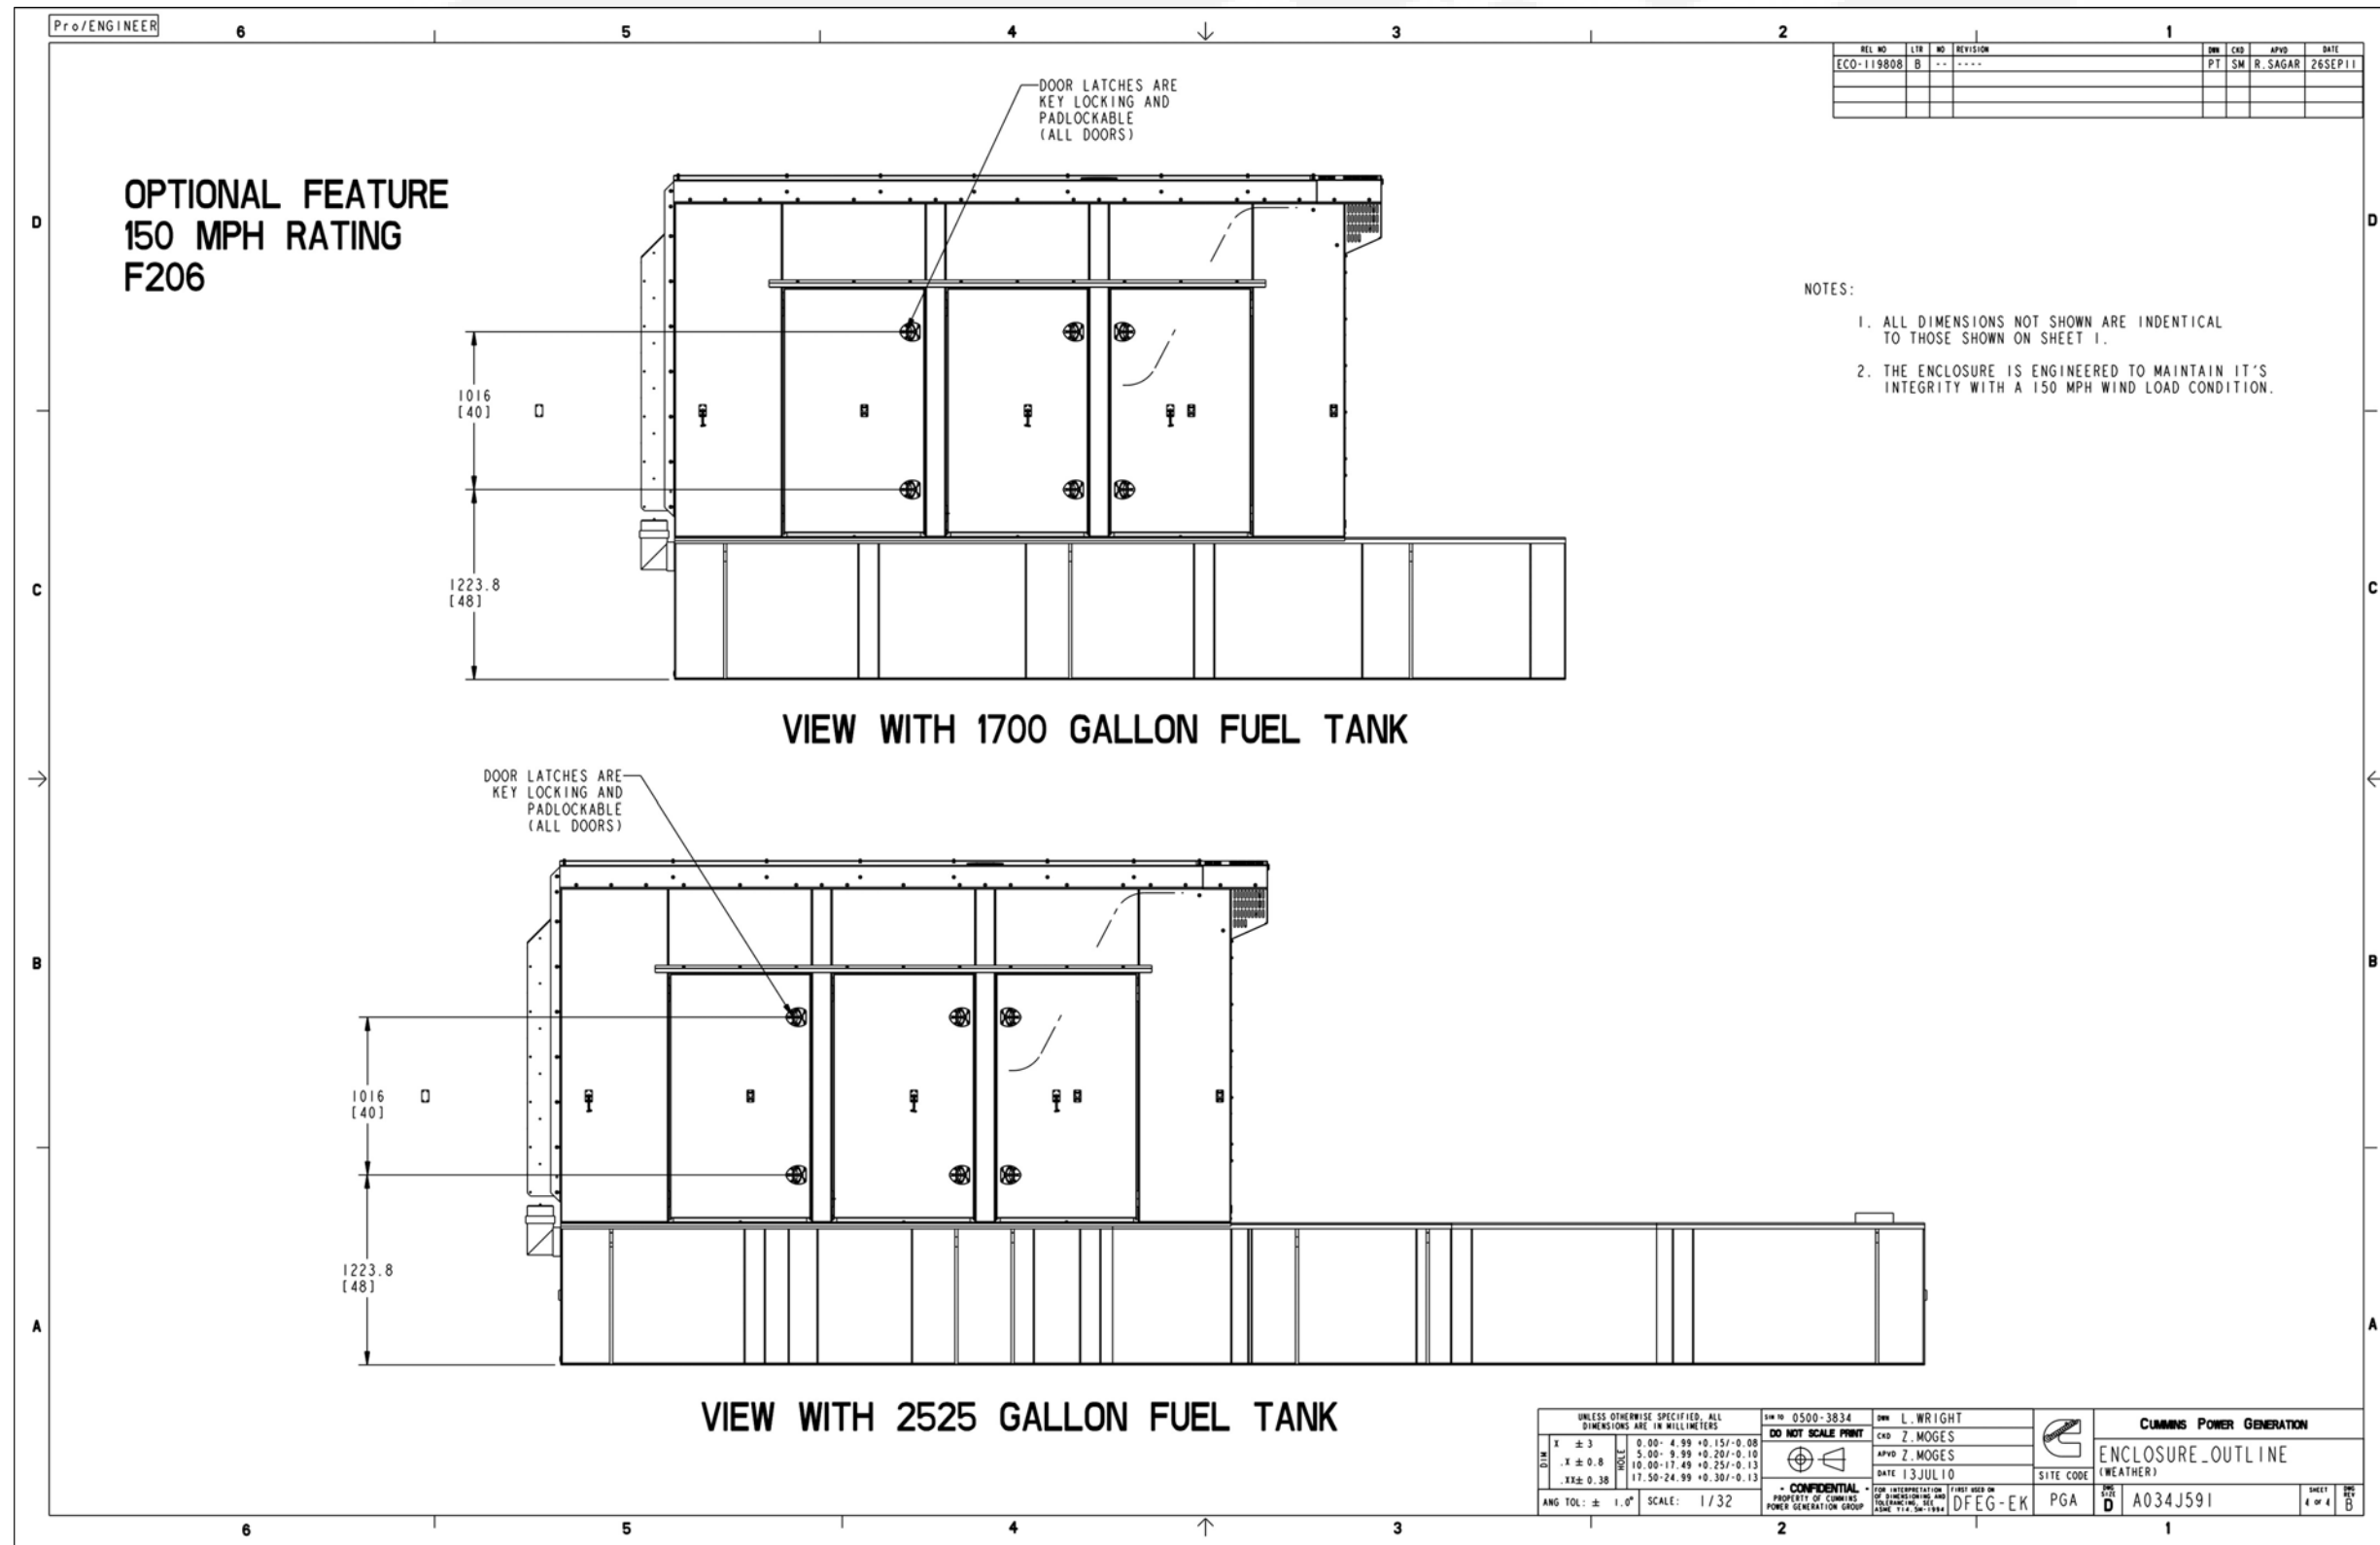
ENCLOSURE OUTLINE DRAWING (F200, F201, F203, F204, F206) (SHEET 4)
